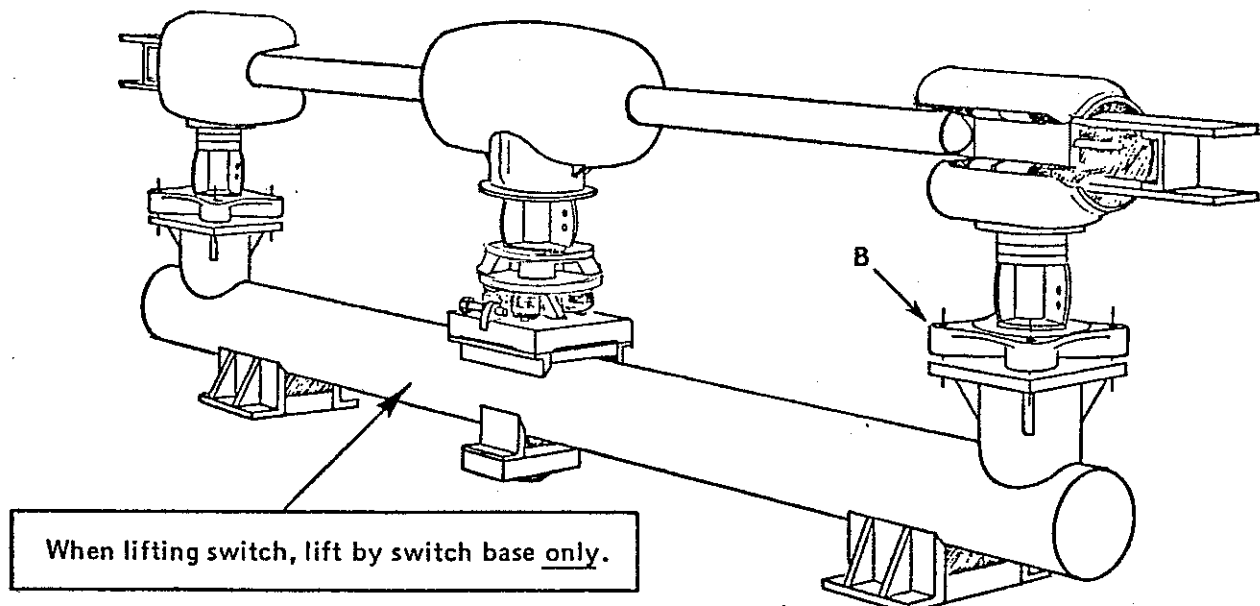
The switch as shipped. Depending upon shipping constraints, the torsional drive gearboxes and grounding switch hinge assemblies (if applicable) may be shipped attached to the switch base. Other components such as corona shields, operating mechanism components, brackets, nuts, bolts, etc., are boxed separately. The insulator mounting adaptor (B) may be either the casting shown, or a 1/2" steel plate.
